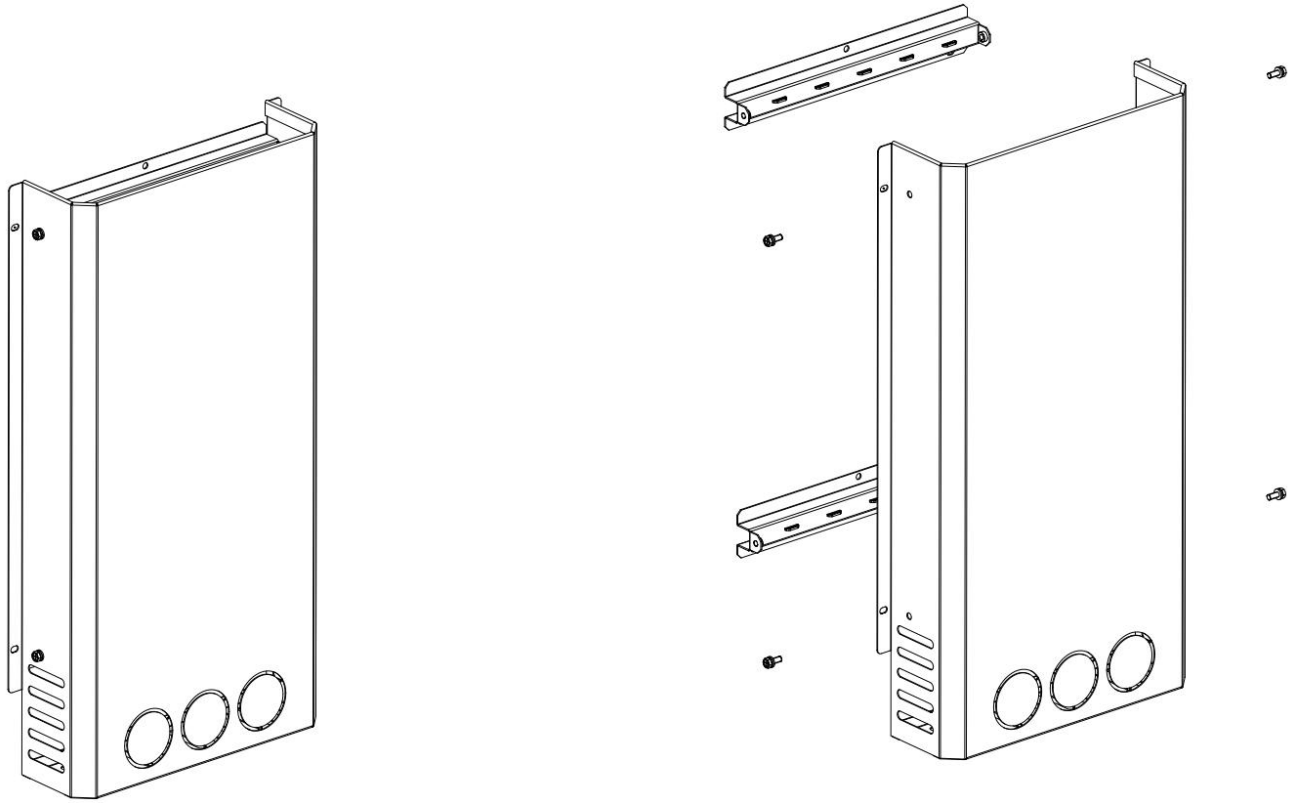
Removing the cable tie board from the cover plate
